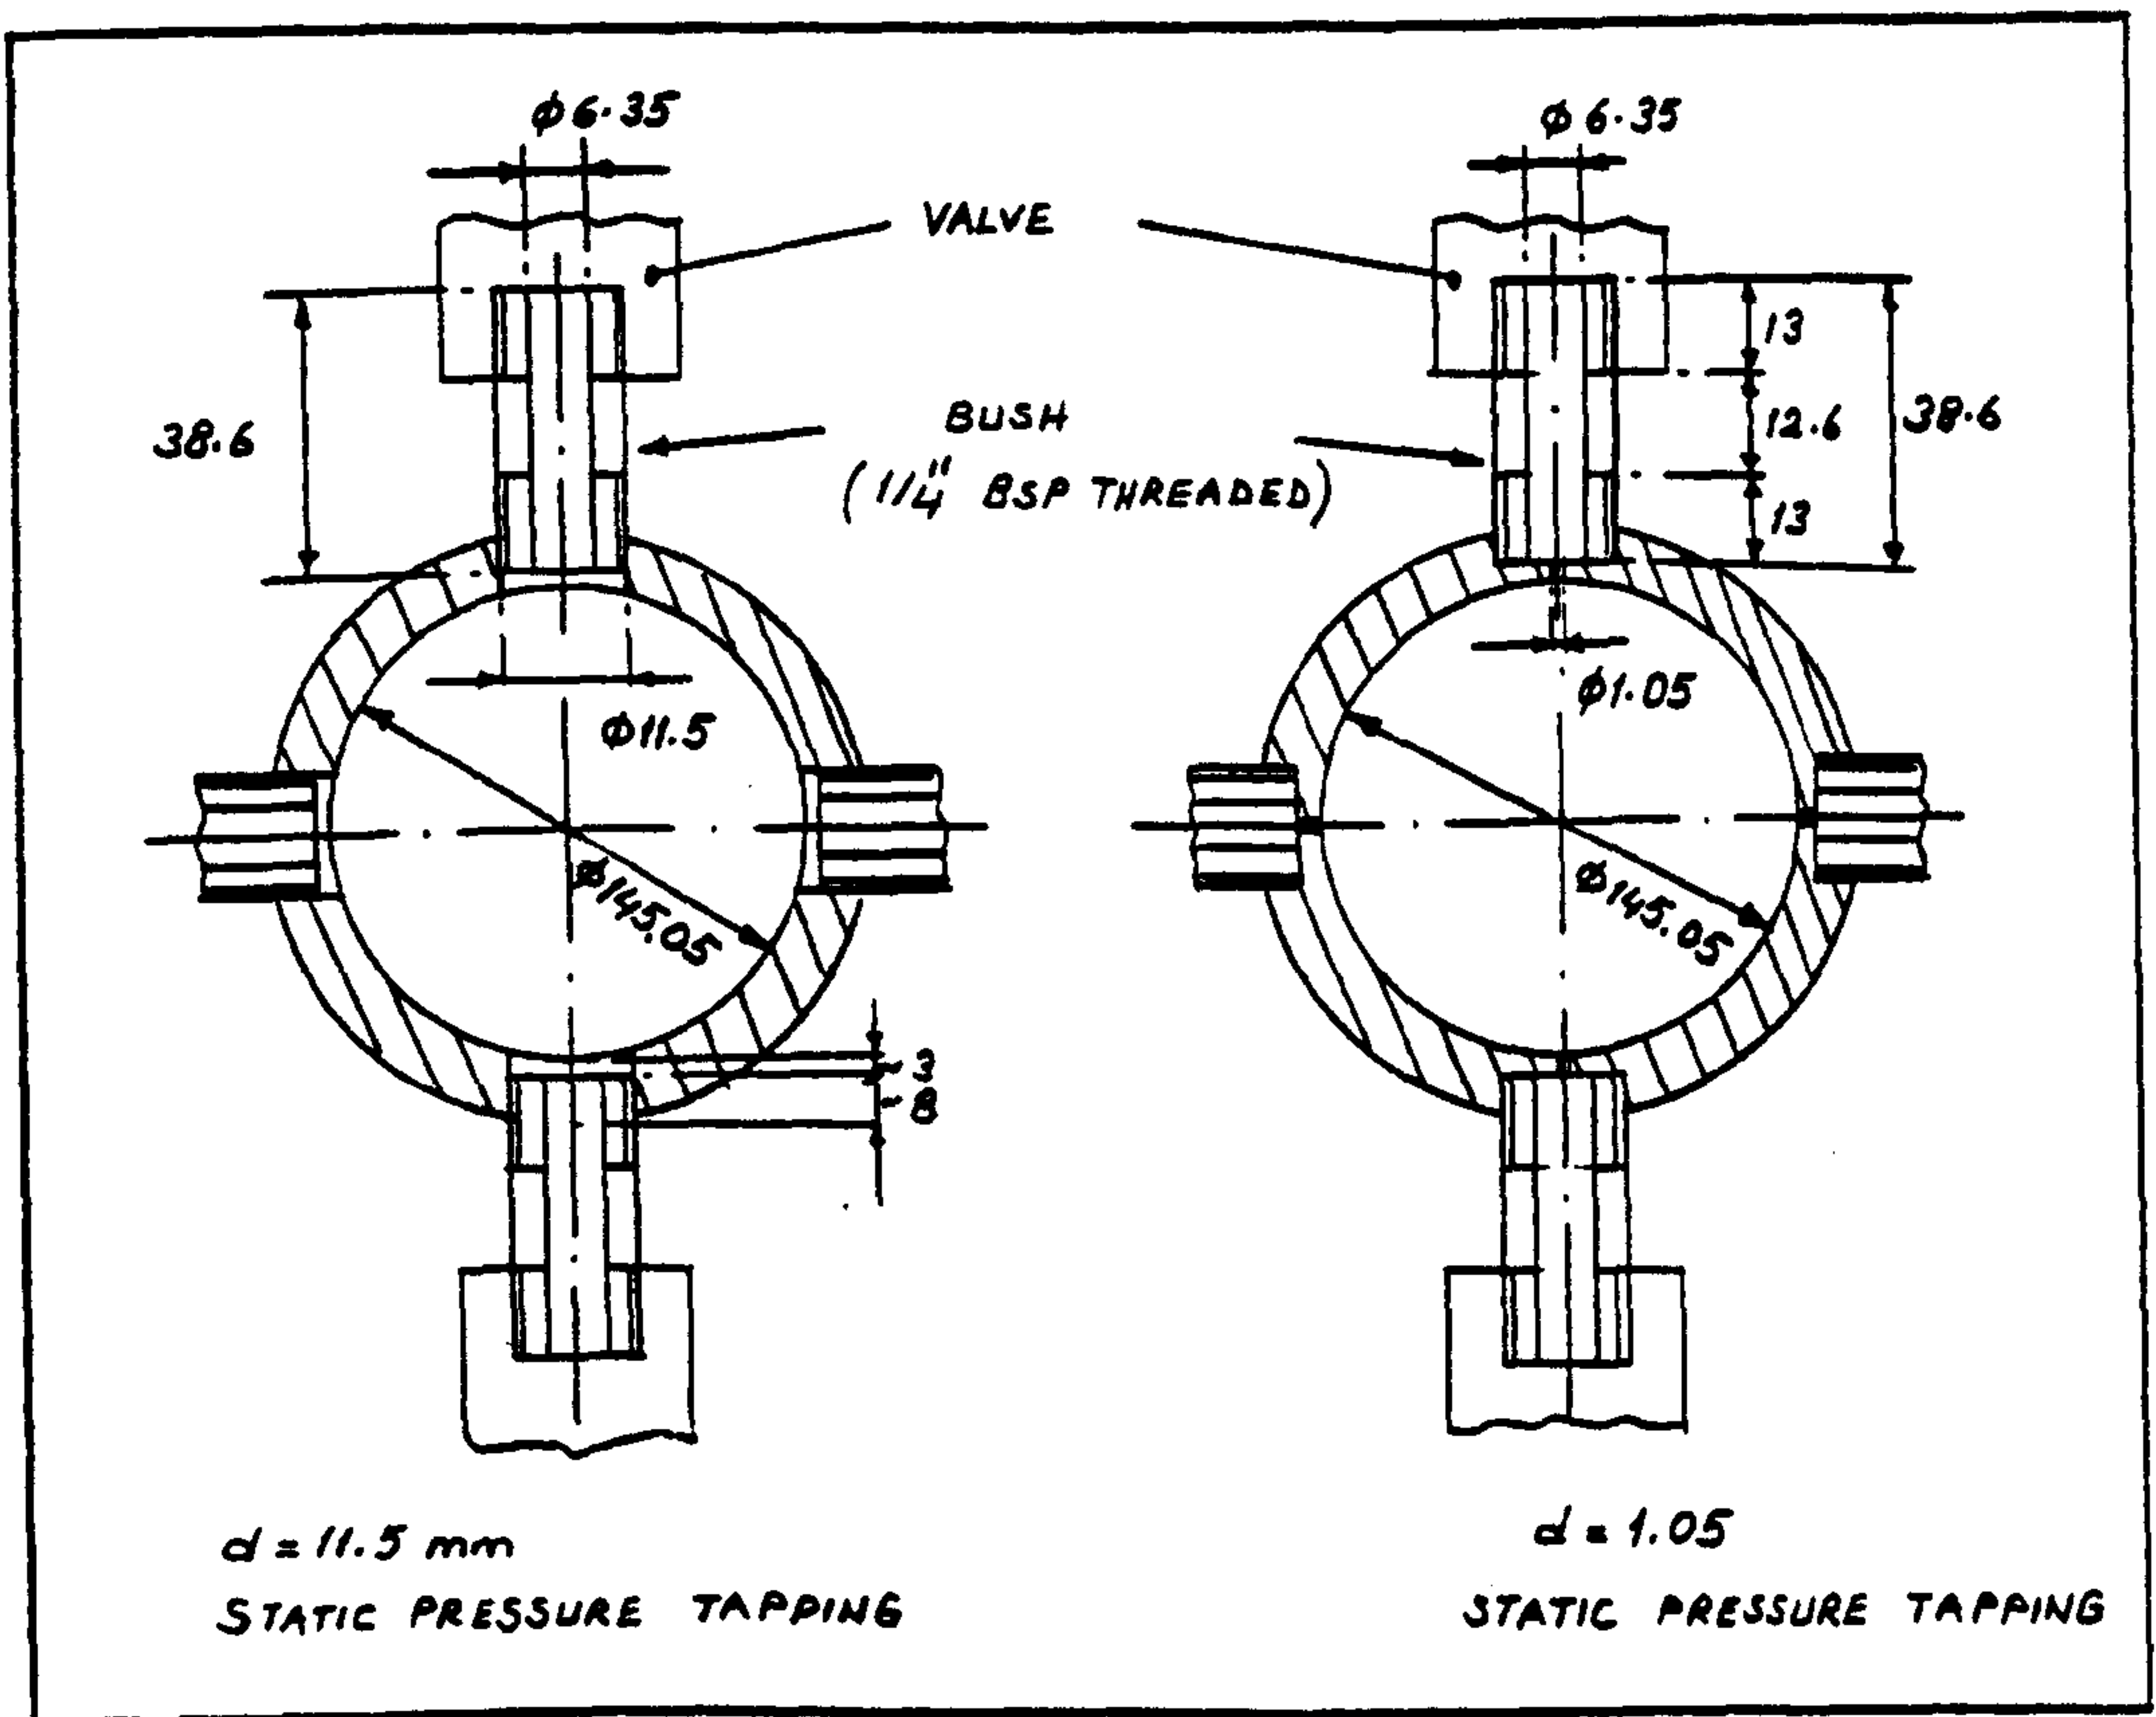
Static pressure tapplings (all dimensions are in millimeter)
